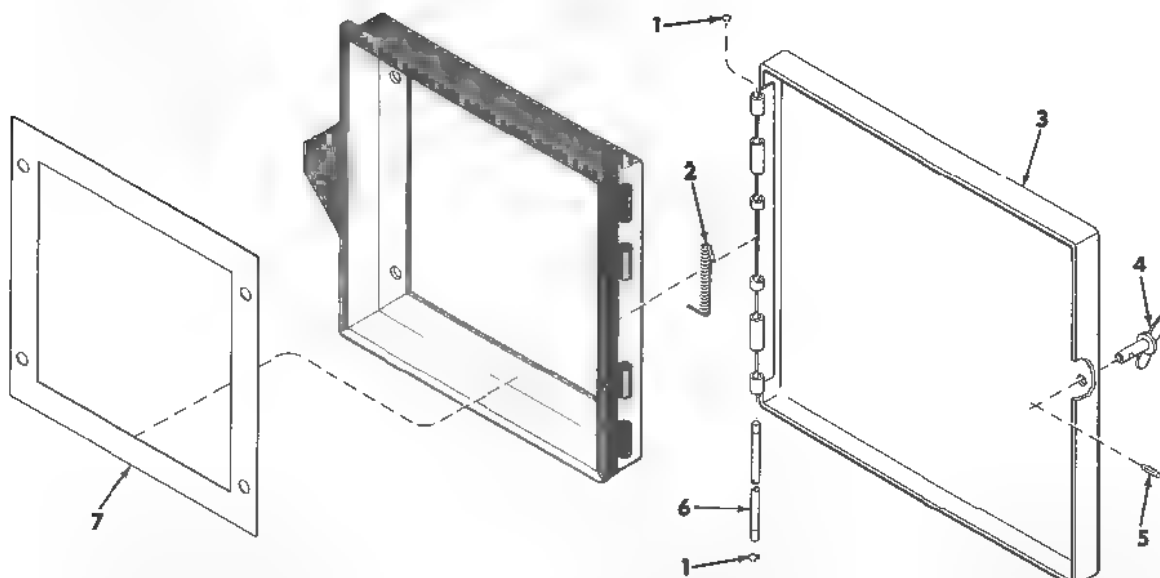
DOOR /8018666/-PARTIAL EXPLODED VIEW
